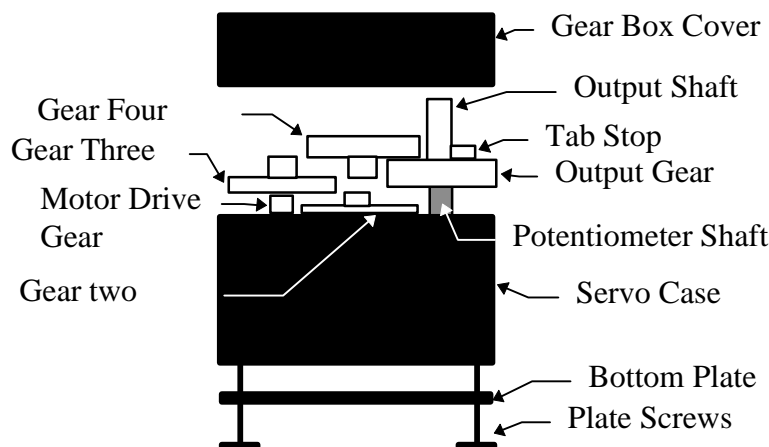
Servo hack: Remove tab stop, remove potentiometer tab inside *Output Gear*, set potentiometer shaft at center setting.
